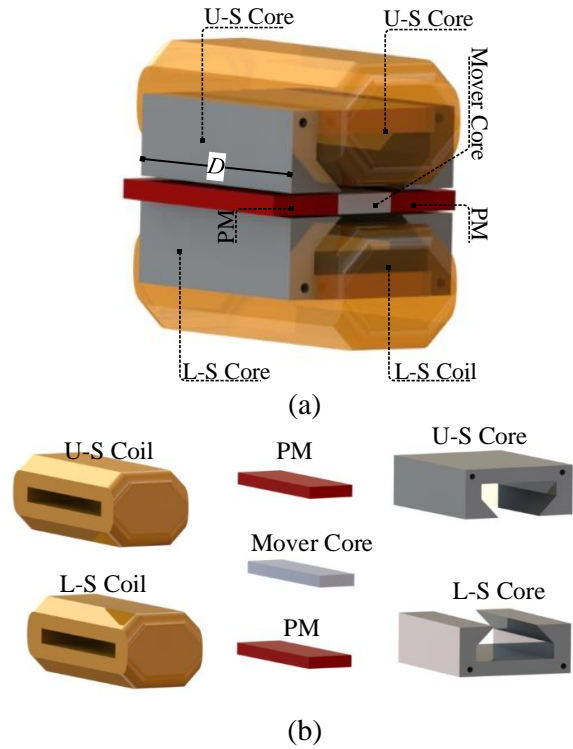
3-D topology of investigated LOA: (a) Complete view, (b) Open parts view.
